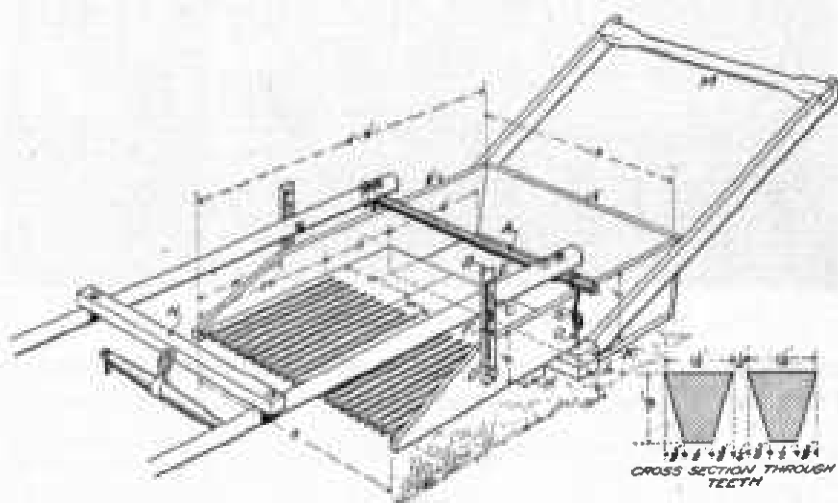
Working drawing of a crimson-clover seed stripper. This stripper is designed to be hung on the axle (A) between two wheels, which, however, are not shown in the drawing. The iron hooks (G) are used for attaching the stripper to the axle. The hooks (G) should be of such length as to keep the bottom of the stripper 6 inches above the surface of the ground. The handle (F) permits the teeth to be raised or lowered to catch the heads at the proper height. The limits to which the teeth may be raised or lowered are fixed by means of the slot (E). This prevents either the front or back of the machine tilting enough to strike the ground. When it is desired to hold the stripper rigid, the removable bolt (C) can be taken out and inserted in one of the holes (E). The bolt (D) should fit loosely in the bottom of board (B) to permit the easy action of the attachment. It is necessary to have the scantling (N) to which the whiffletree is attached fastened to the shafts far enough in front of the teeth to prevent the horse's hoofs from coming in contact with the teeth of the stripper. The teeth are sawed out of oak boards, which in turn are nailed to scantlings (H and K).
